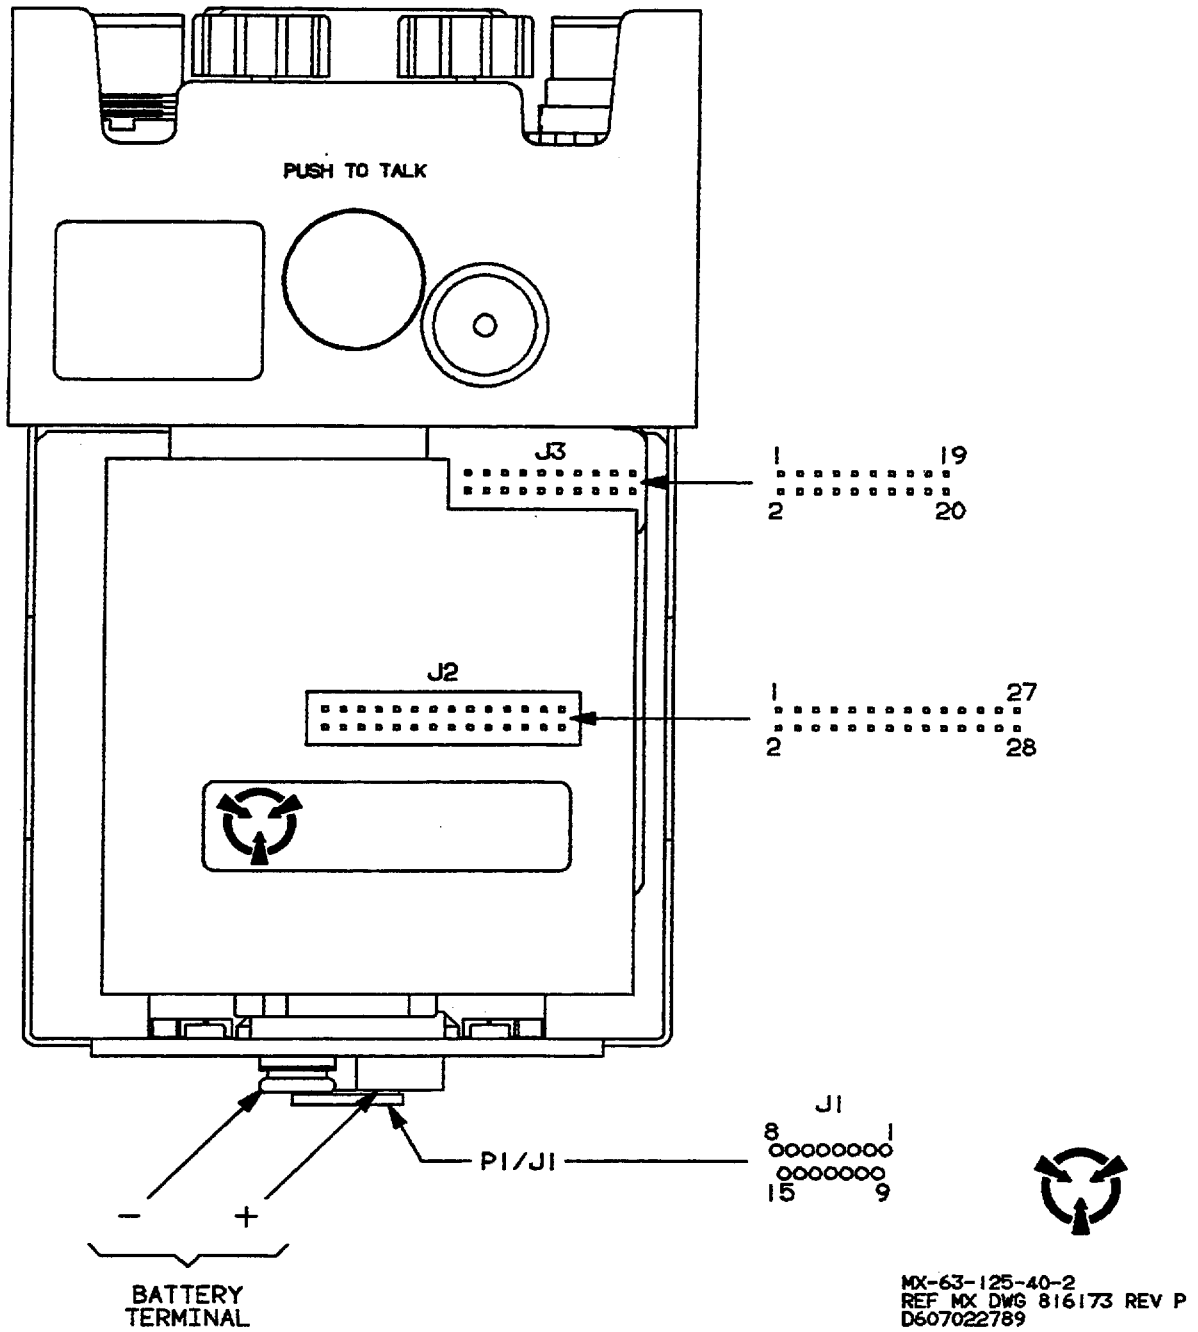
RT Frame/Panel Component Location (Sheet 2 of 2)
